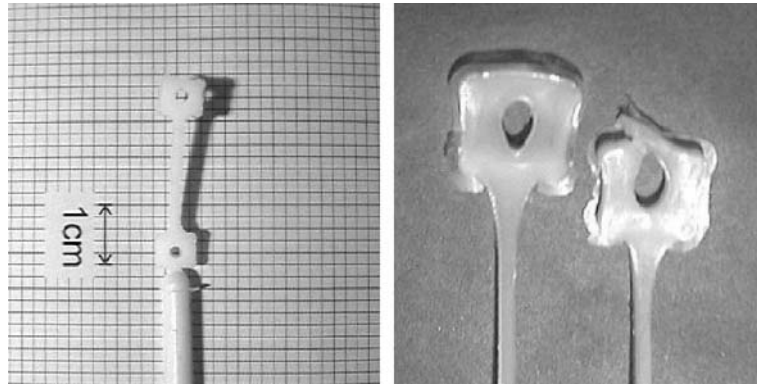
An injection-moulded dog-bone specimen used in tensile testing, and the ends of two tested specimens, one of which is torn at the hole.
